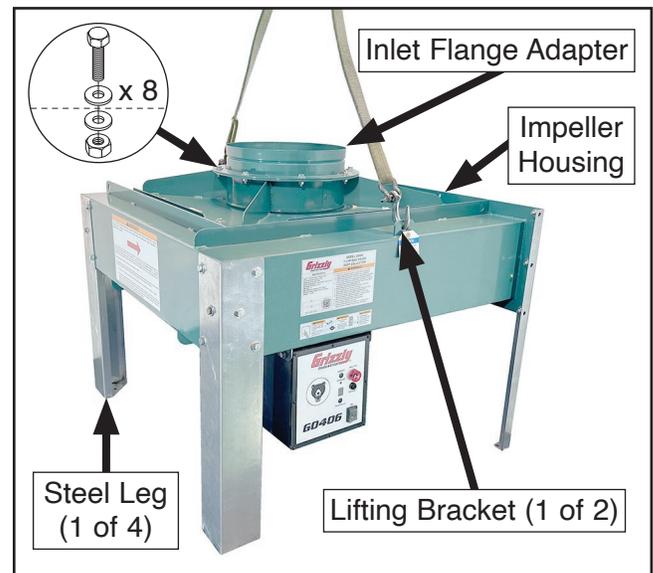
Location of inlet flange adapter, lifting brackets, and pre-installed steel legs.
